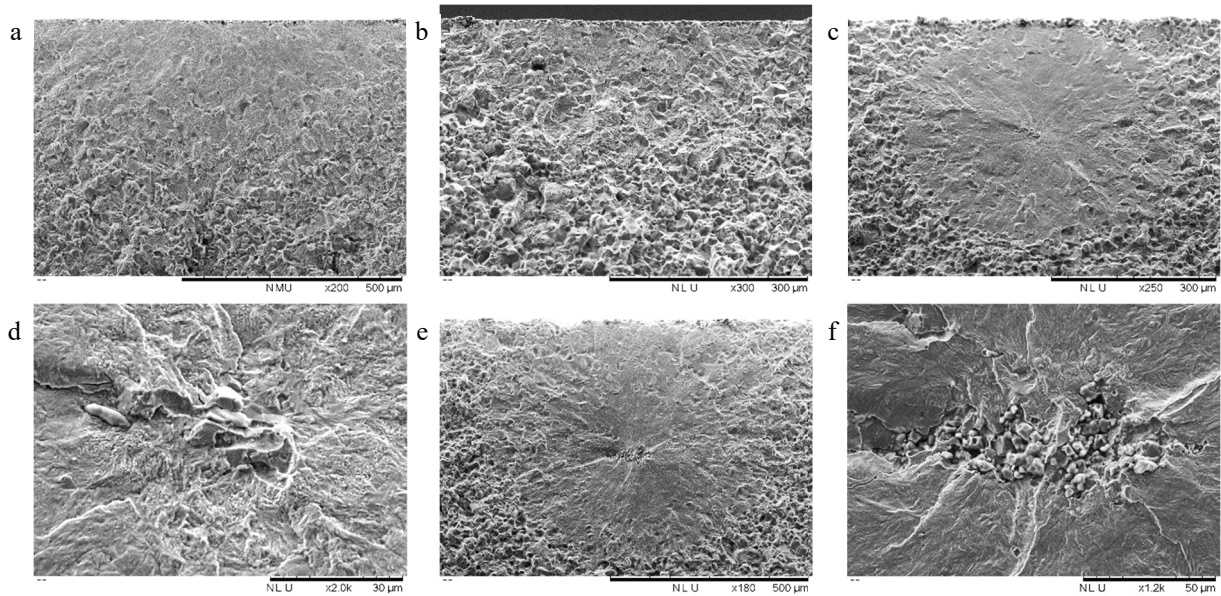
Fracture surfaces (a) Carburised (baseline) (b) Carburised + CCW (c) Carburised + S230H (d) Inclusion from Carburised + S220H sample (e) Carburised + S330H (f) Inclusion from Carburised + S330H sample
